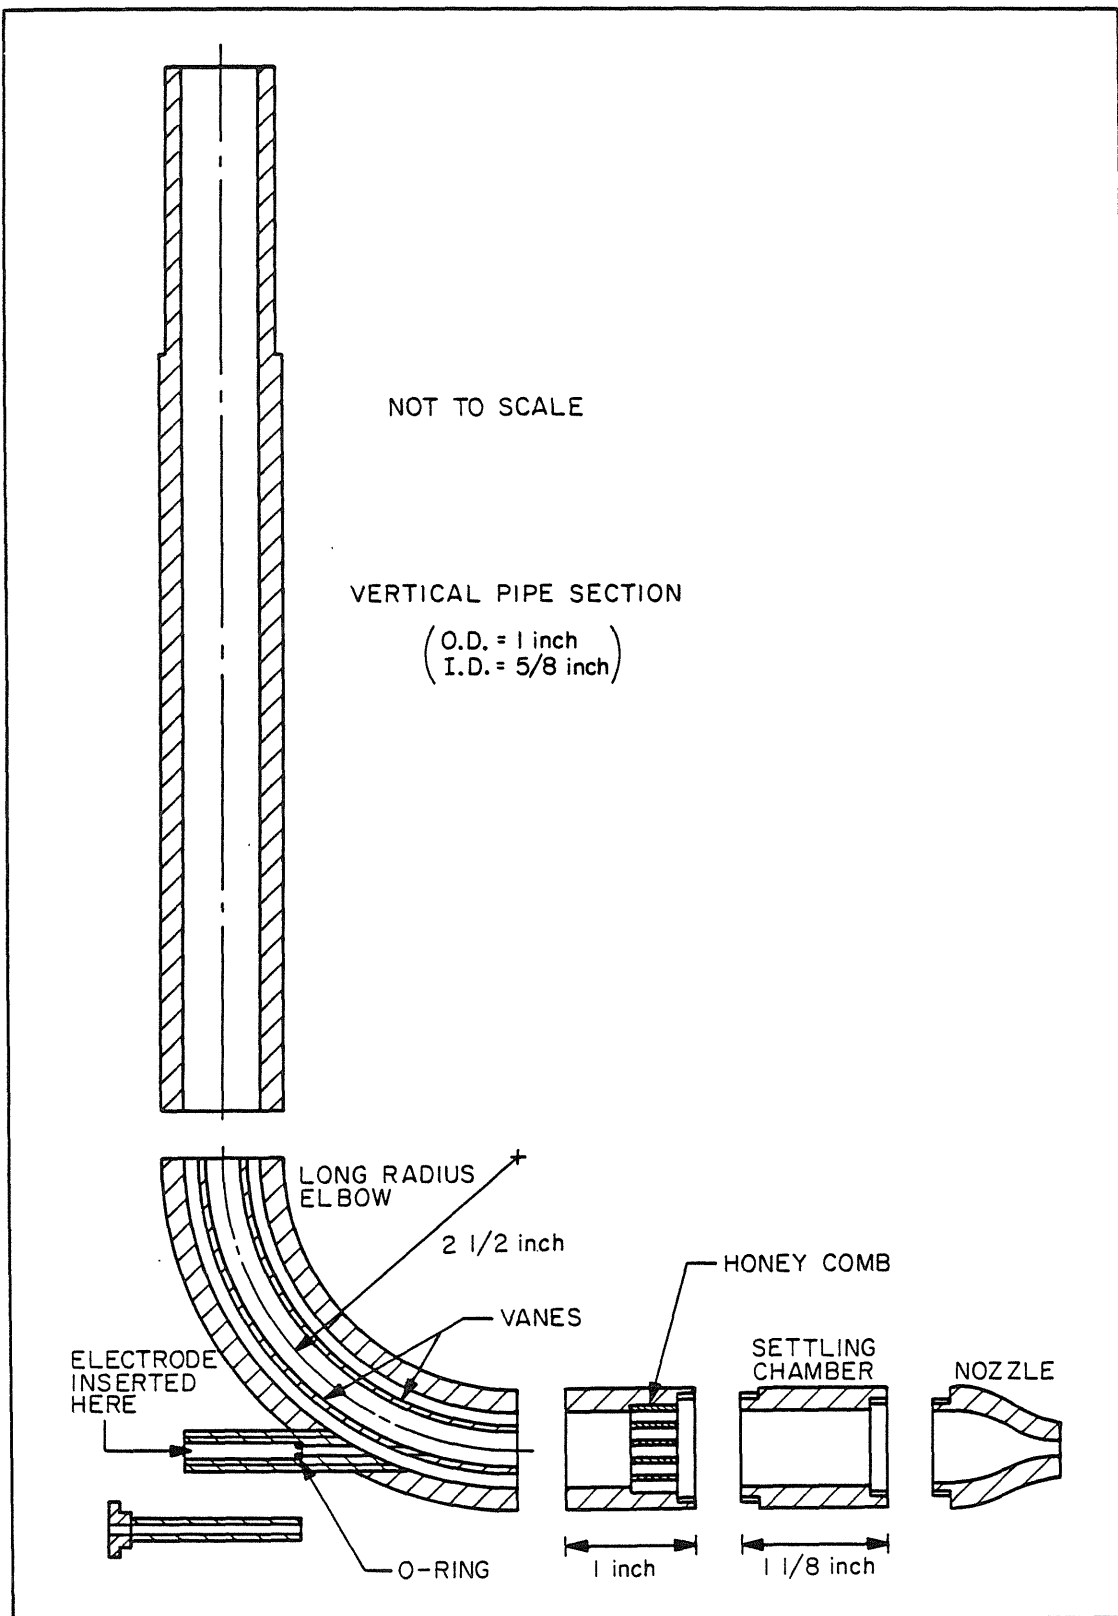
Diagram showing the geometrical details of the nozzle assembly.
